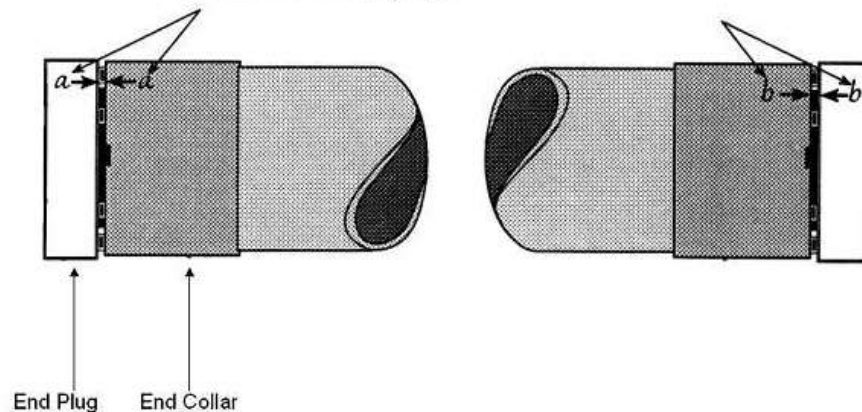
Pressure Vessel End Plug Assembly Callout.
